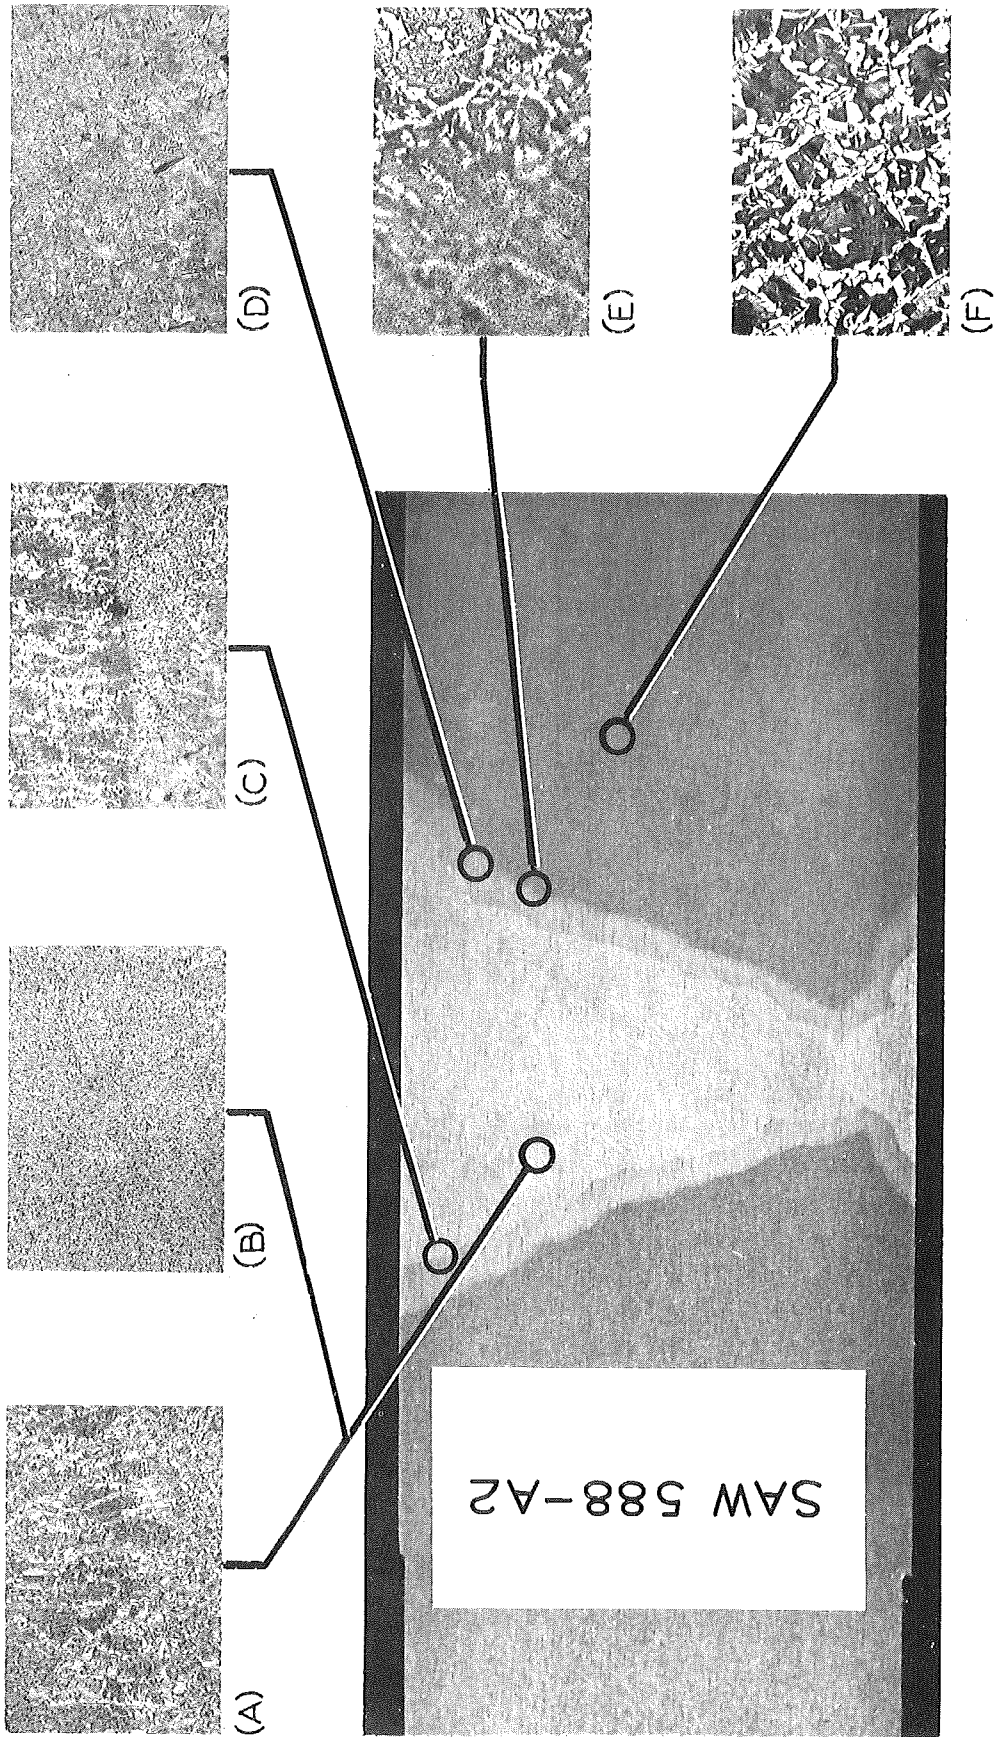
Submerged arc weld by Fabricator A on 3-in. A 588 steel. Microstructures shown are: A) as deposited weld metal, B) weld metal refined by a subsequent pass, C) fusion line (HAZ on bottom), D) HAZ beyond fusion line, E) interface between HAZ and base metal, F) unaffected base metal. (Microstructures at 100x, etchant 3 percent nital.)
